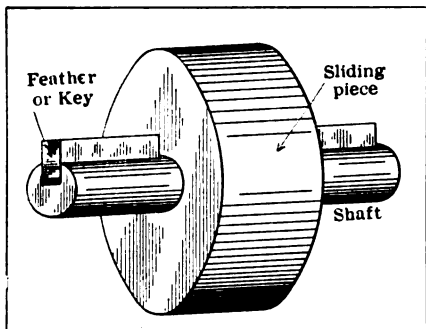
Showing method of arranging feather or key as a guide for sliding piece
